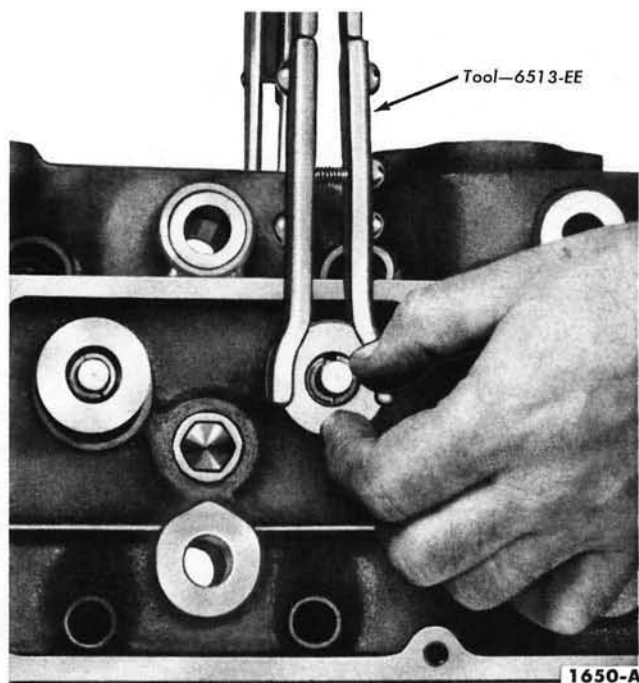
Valve Spring Retainer Locks—Removal or Installation
